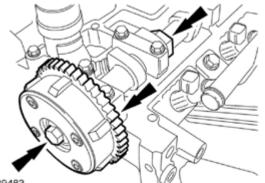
Locating Flats On Camshaft, Bolt And Exhaust Camshaft Sprocket Courtesy of FORD MOTOR CO.
